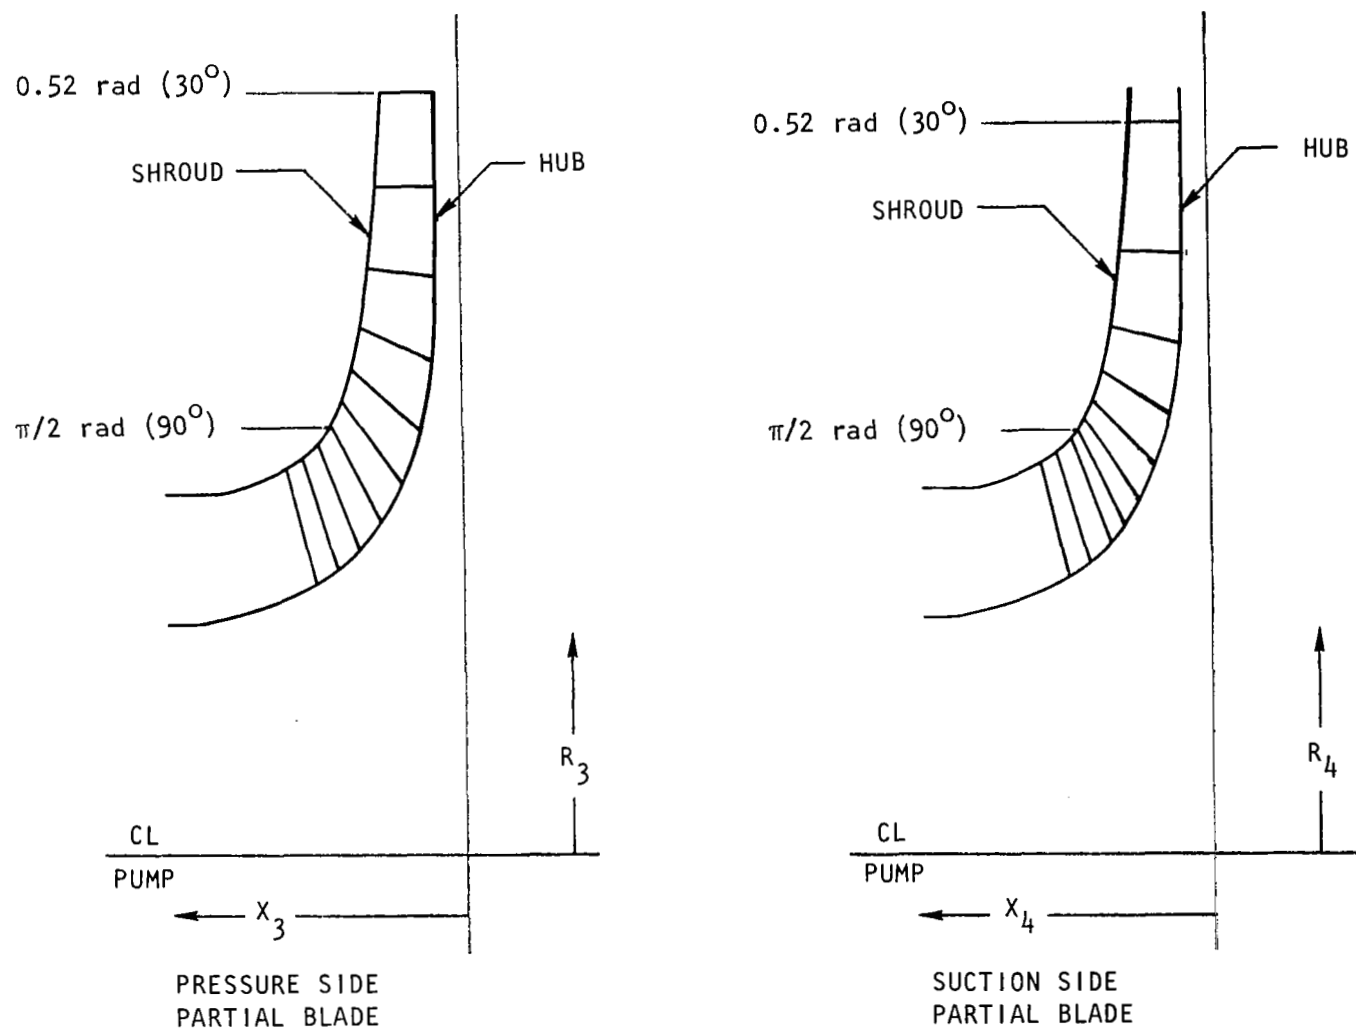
Impeller Cross-Section Layout With Partial Blade Wrap Angles
